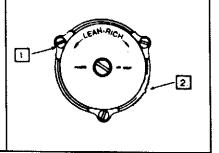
AUXILIARY VACUUM BREAK ADJUSTMENT (Choke side)
